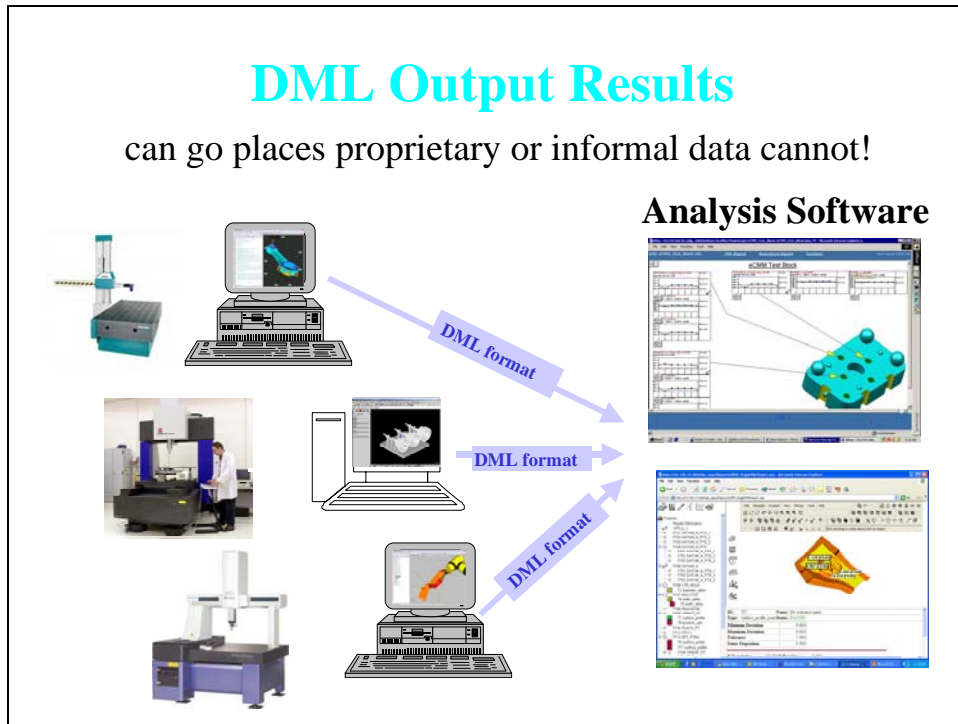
The Dimensional Markup Language (DML) specifies the format for inspection result files, using XML technology.
